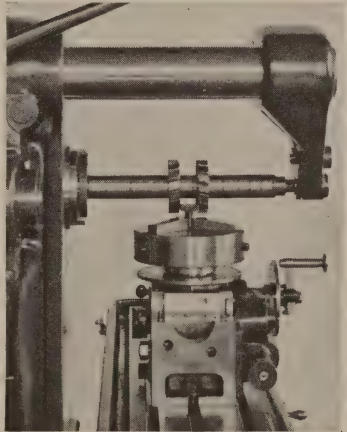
Straddle milling a square on a short piece. Index-head spindle is vertical.
